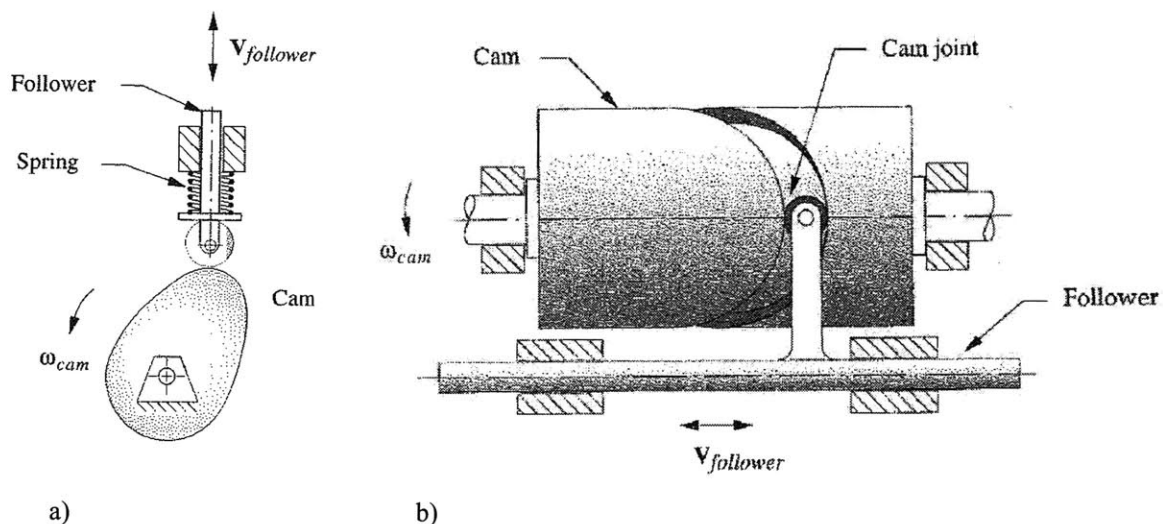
a) Radial Cam, b) Axial Cam [39].
